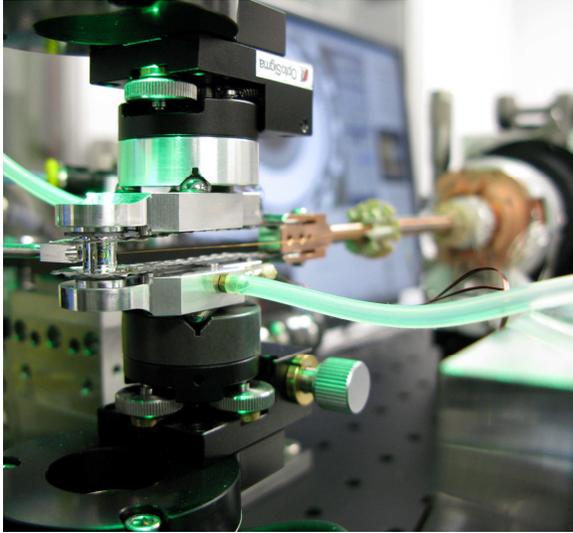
The upper and lower target half subassemblies are held in the FlexFAM by magnetically-coupled kinematic tooling mounts. The relatively long target base assembly, which gets connected to the ends of the upper and lower target half subassemblies, fades out of focus on the right side of the figure.
